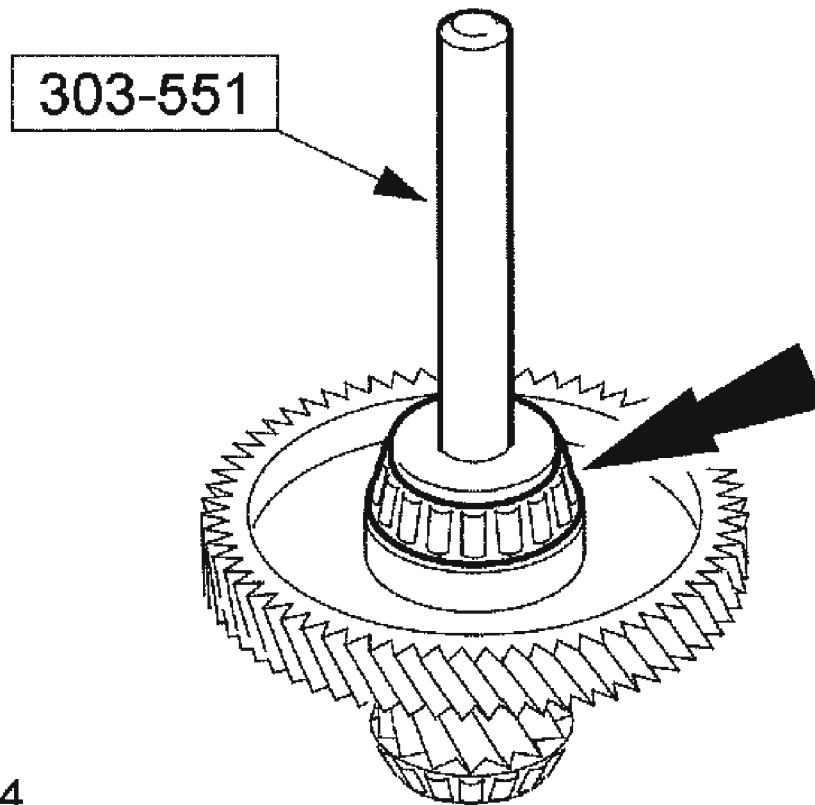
Installing Right-Hand Side Transfer Shaft Gear And Park Gear Assembly Using Special Tool
